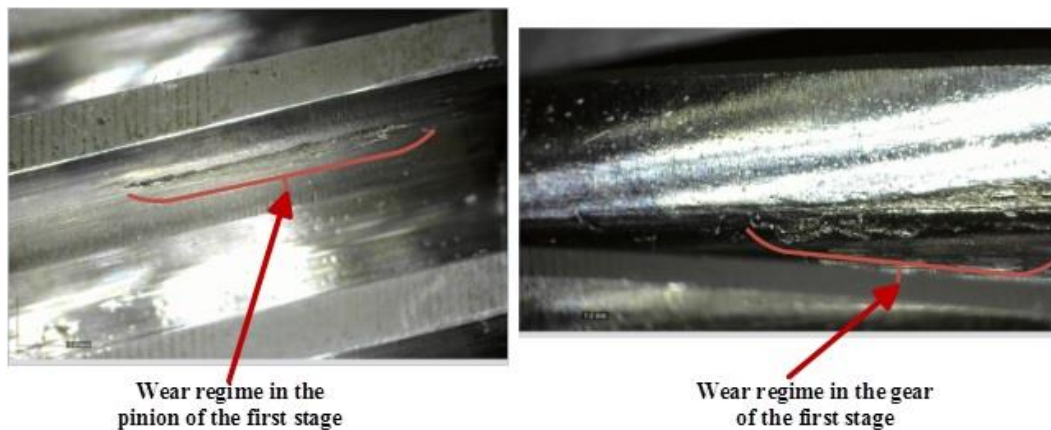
Gear wear fault from a run-to-failure test
